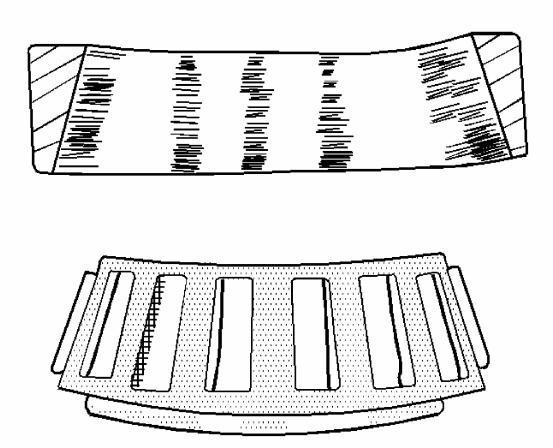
Identifying Cage Wear Courtesy of GENERAL MOTORS CORP.
